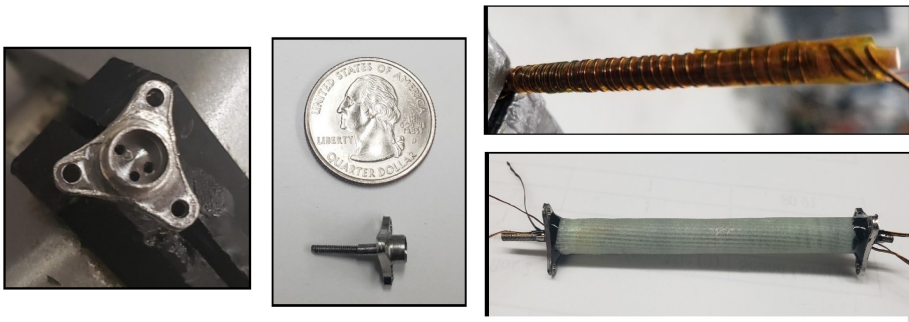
Mandrel plugs (left) and PRT wiring inside mandrel and assembled G10 mandrel (right).
